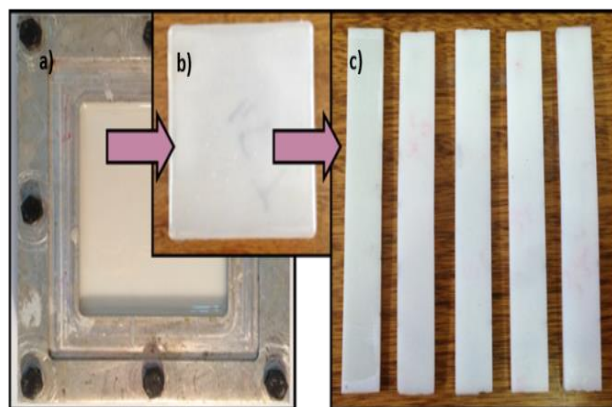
Bending test tubes: a) Obtaining mold, b) Sample for manufacturing test pieces and c) Test tubes machined and ready for the bending test.
